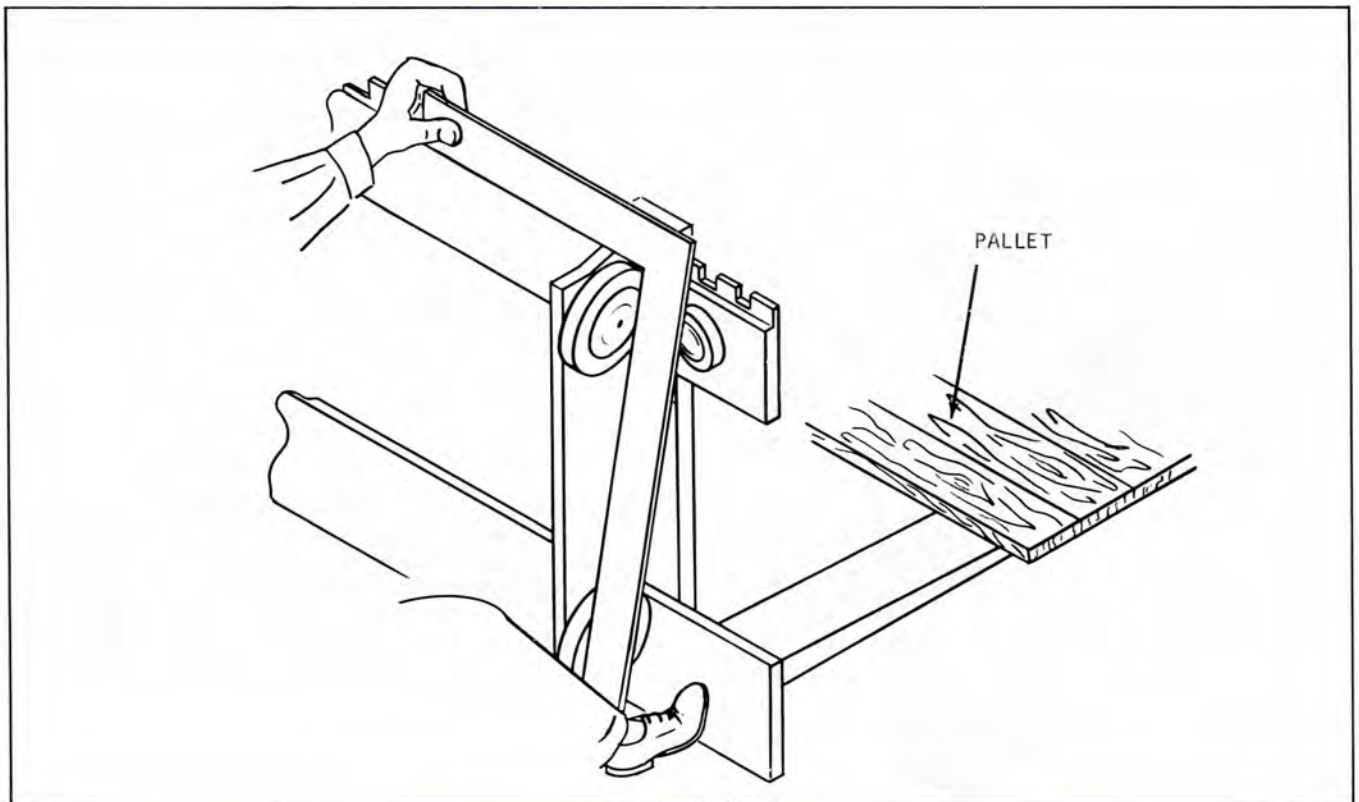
Squaring Carriage Rollers (Four Roller Carriage)
